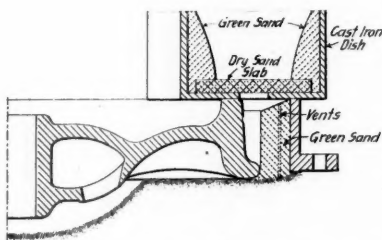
Method of Pouring for Heat Test, C. B. & Q. R. R.
